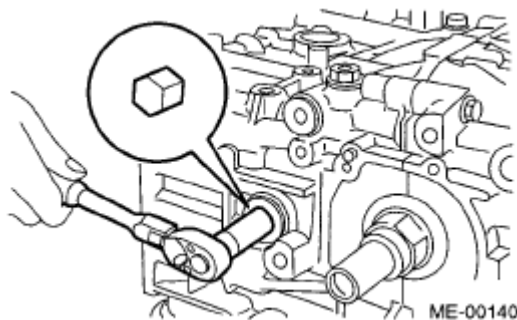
Removing Service Hole Plugs Using Hexagon Wrench (14 mm)
